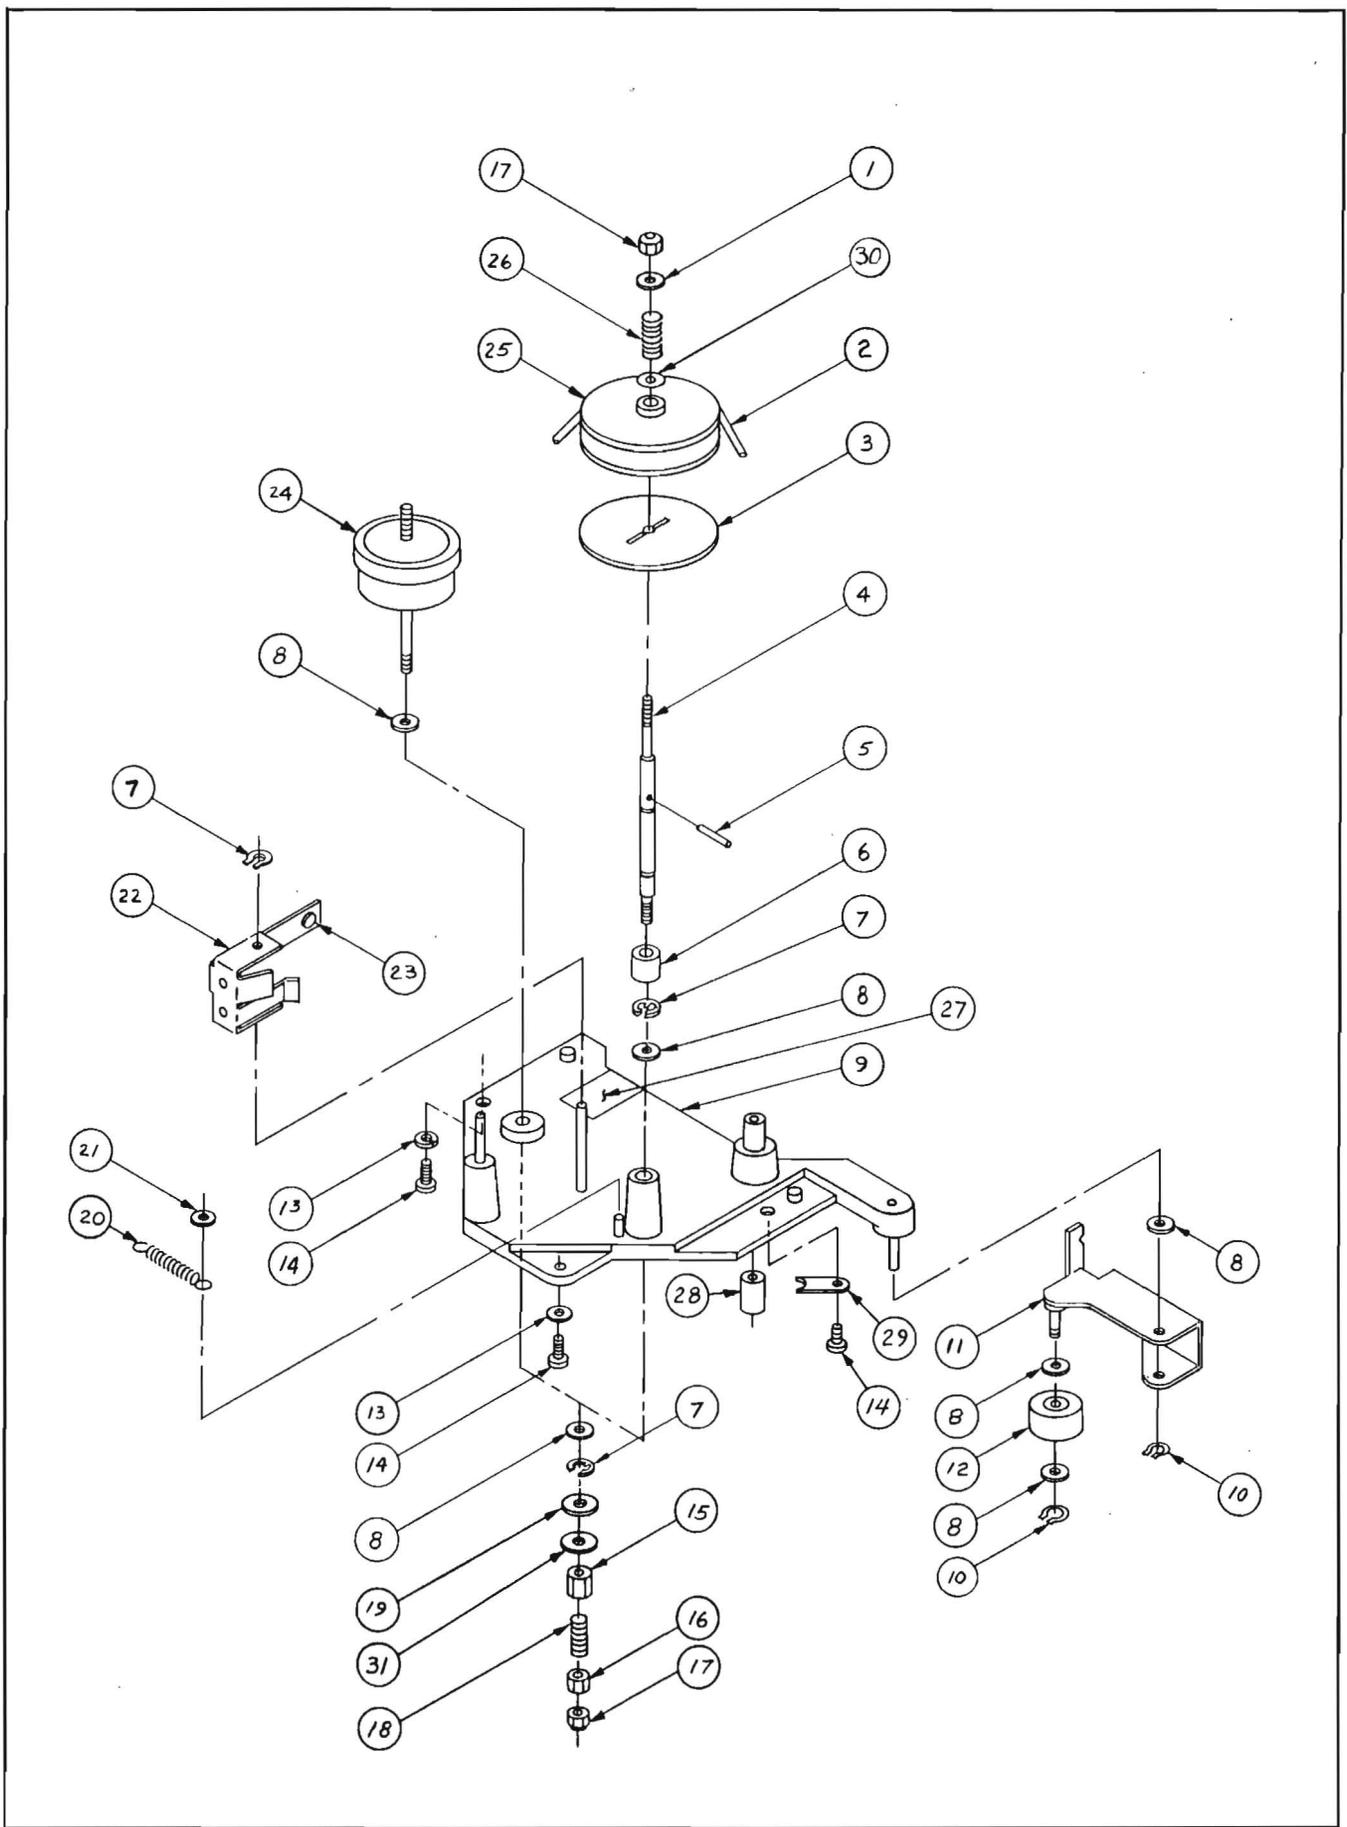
Cassette Capstan Bearing Plate Exploded View - Slave Position
